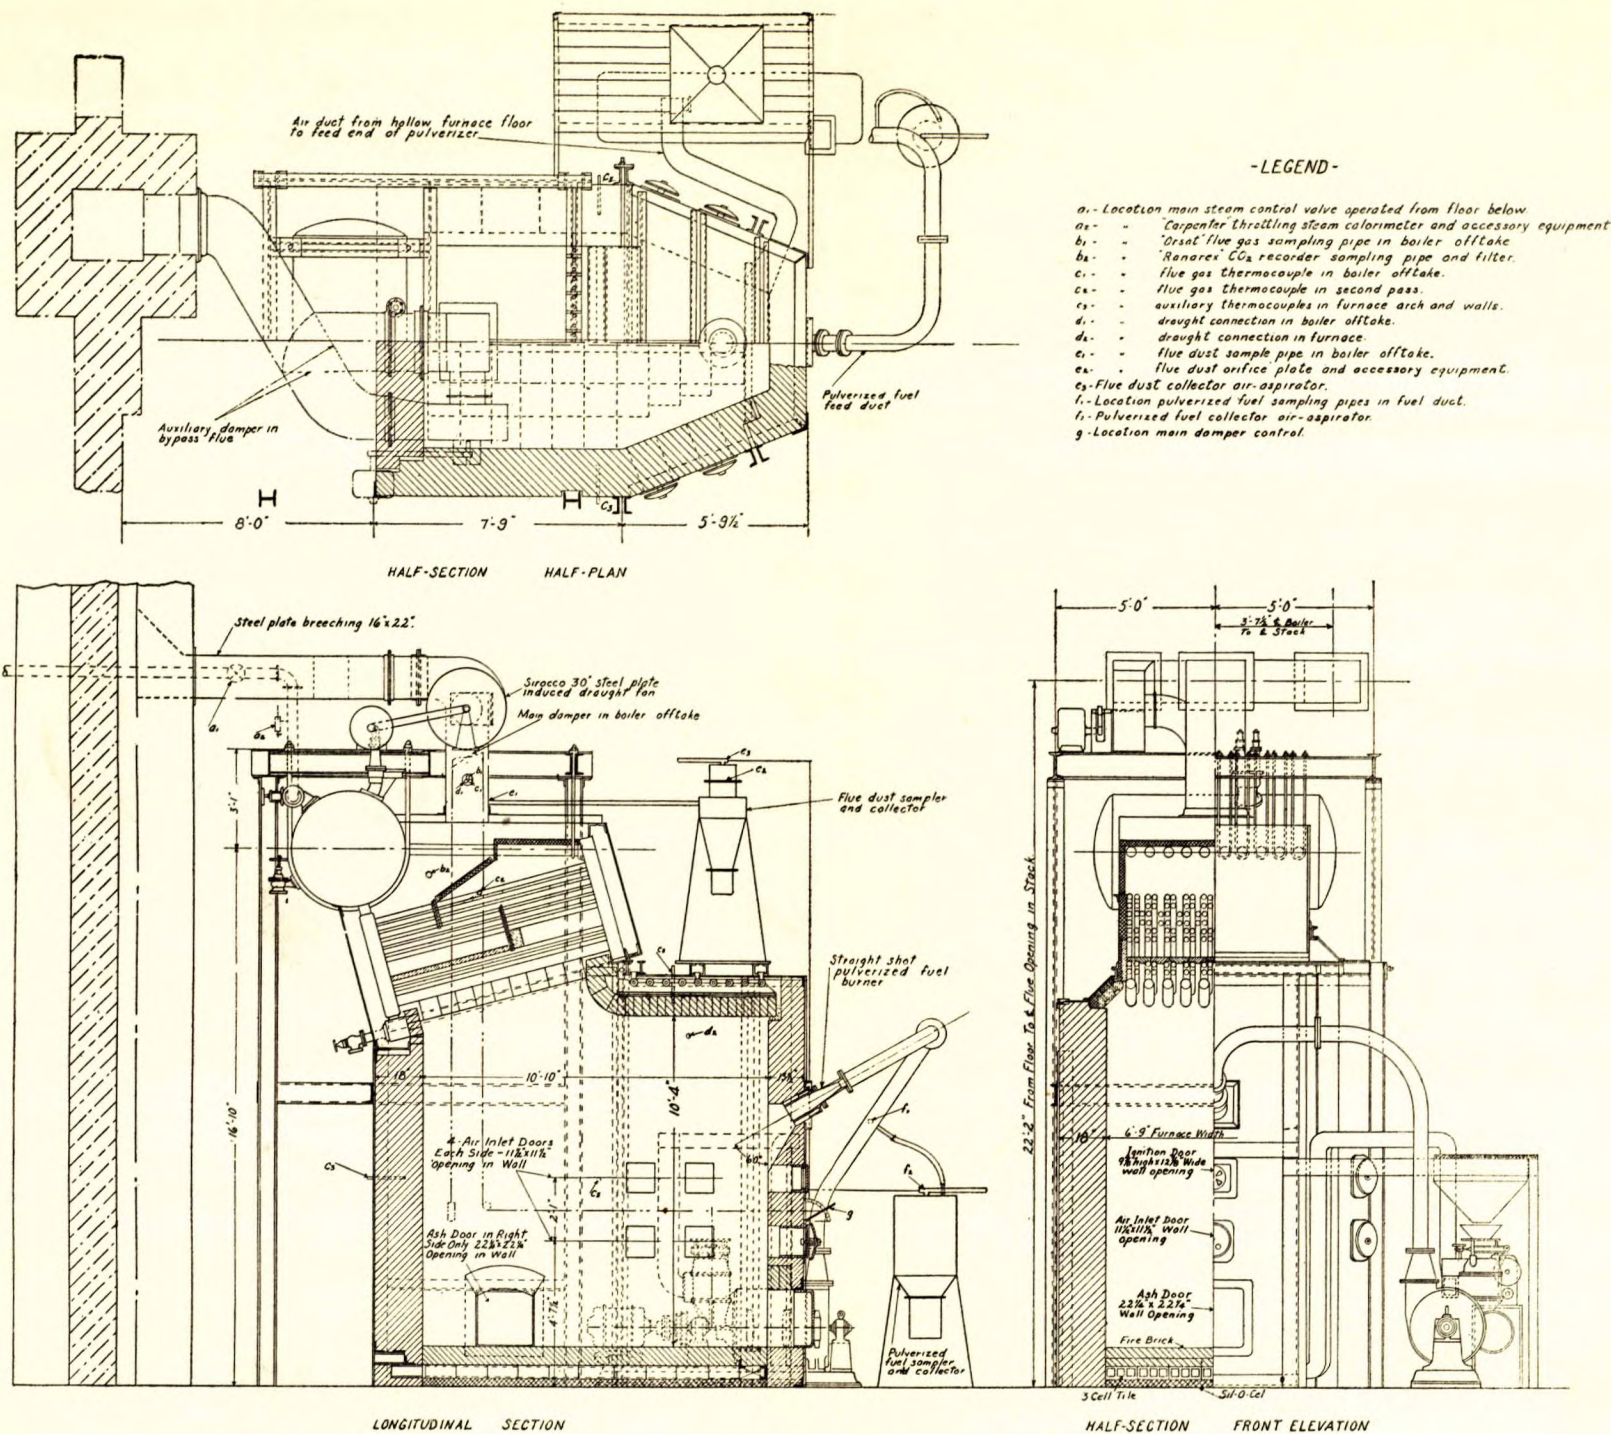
Half plan, half front elevation and sections showing pulverizer unit applied to marine type, water-tube boiler and solid, refractory wall furnace with hollow, air-cooled floor. Location of points is shown by legend.
